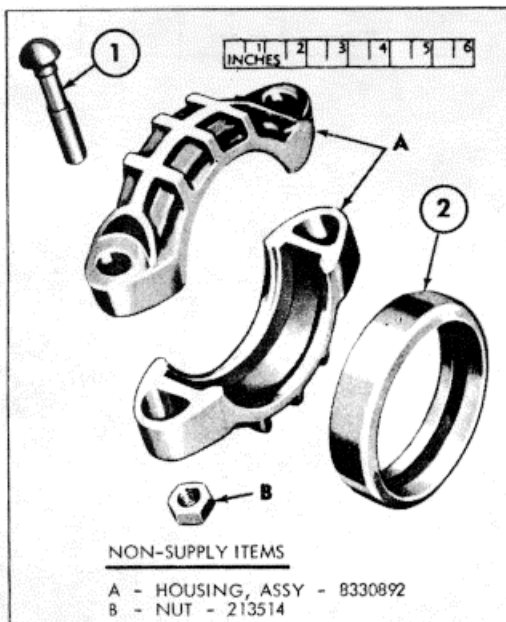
MANIFOLD COUPLING-EXPLODED VIEW.
